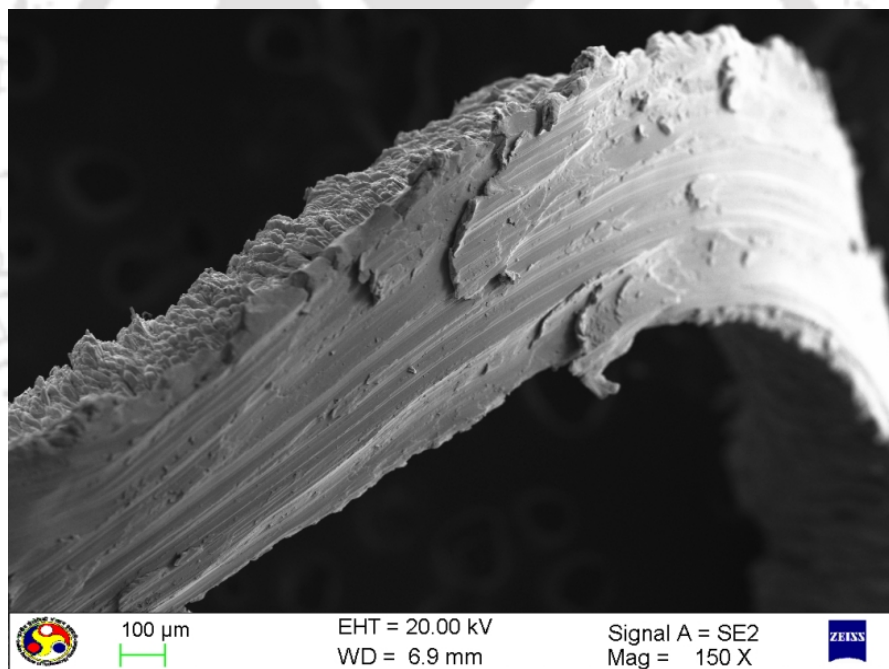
(a) Back surface of the chip produced by straight WC-Co cutting tool
